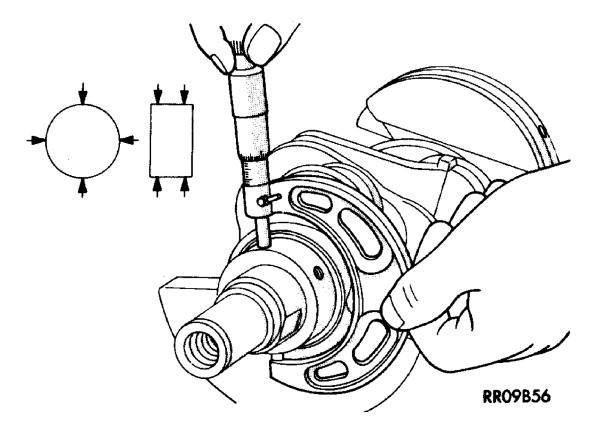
Crankshaft Journal Measurements - Typical Courtesy of CHRYSLER LLC
